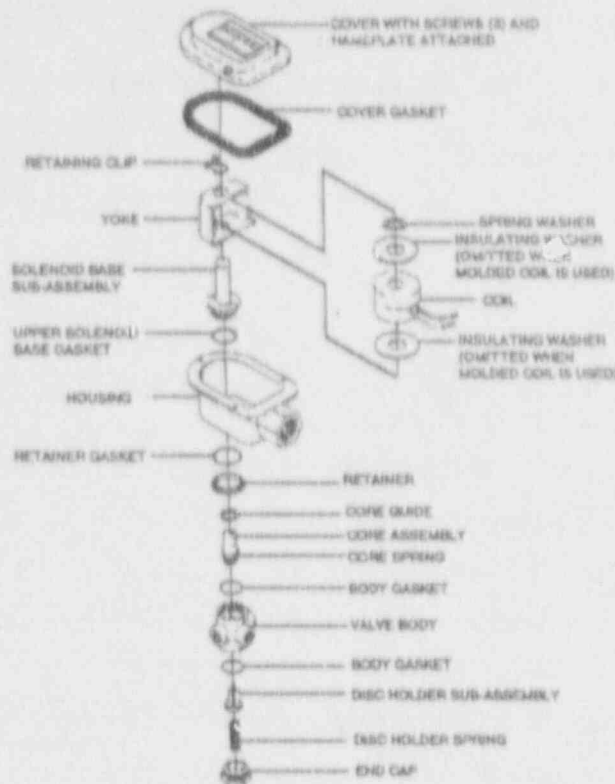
Exploded view of a typical enclosed type, direct-acting three-way SOV.
